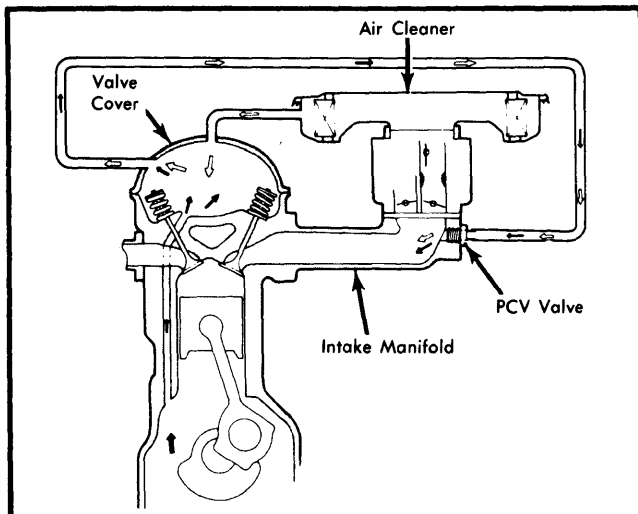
Crankcase Ventilation System for Piston Engines (GLC, 626 and B2000)
